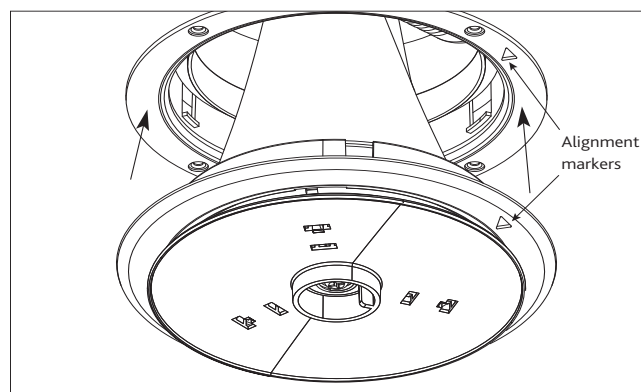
Fit damper assembly to main body by aligning the triangle symbols, then press together and twist damper assembly clockwise, (you will hear a click when damper assembly is in a 'locked' position.
